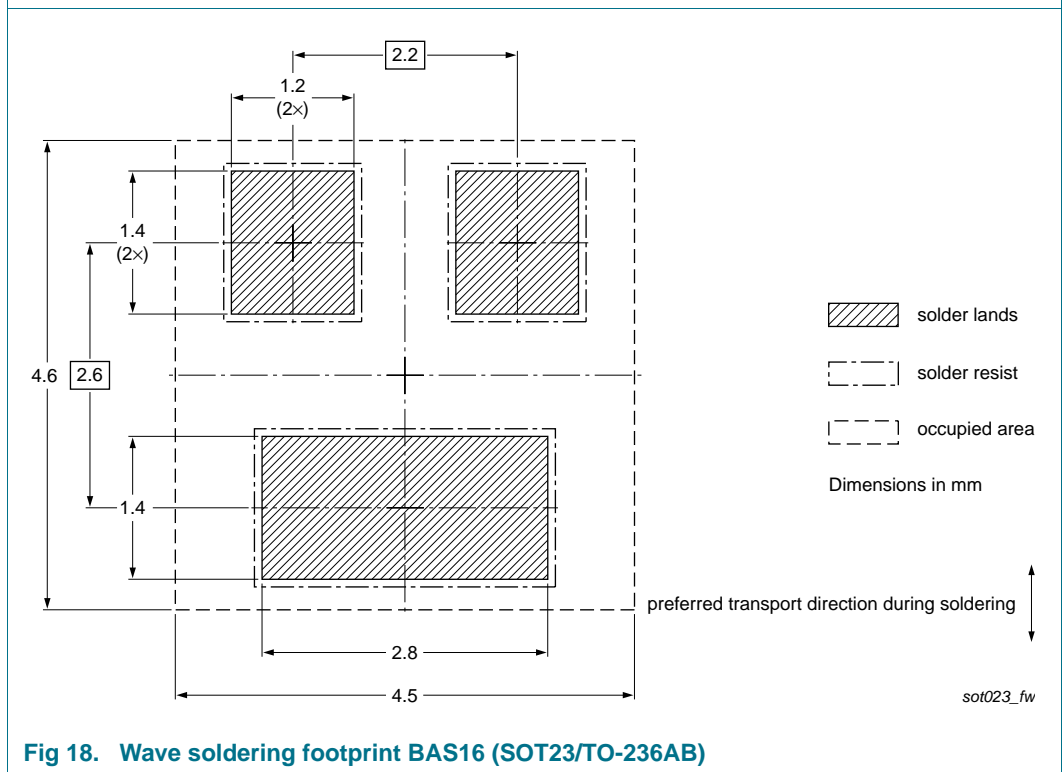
Wave soldering footprint BAS16 (SOT23/TO-236AB)
